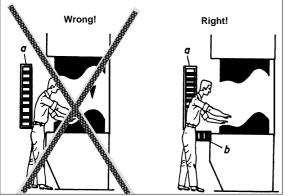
/3 Protection against walking behind through cascading of two light barriers
